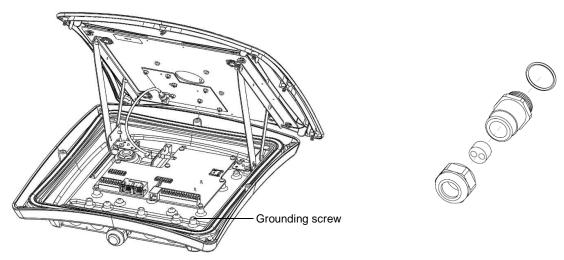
XT-1 with open lid (left), cable gland with insert for two cables (right)
